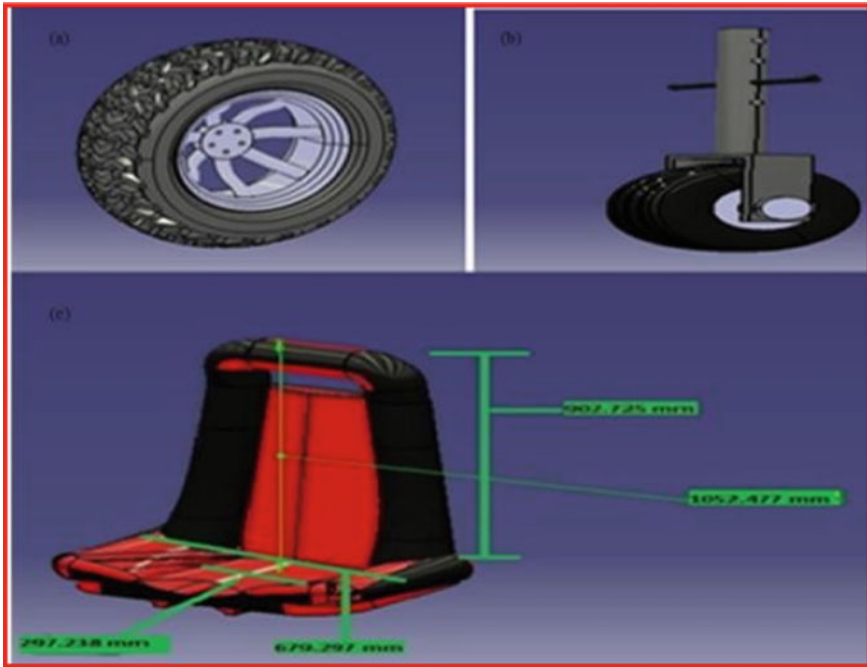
Design of a main wheel, b supporting wheel, and c seat construction
